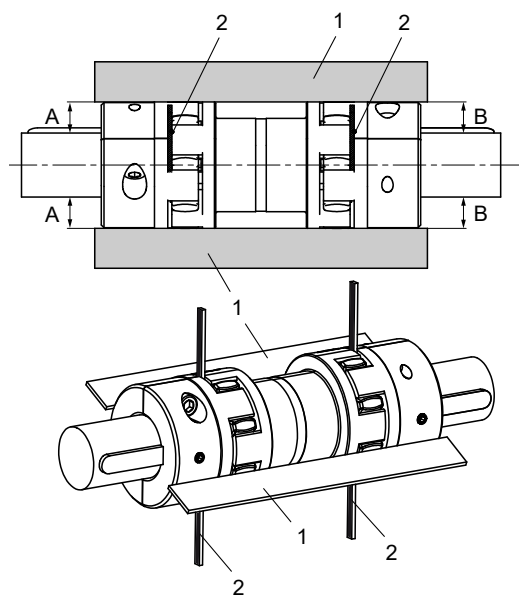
Double Cardan spacer-type coupling, checking the coupling alignment
